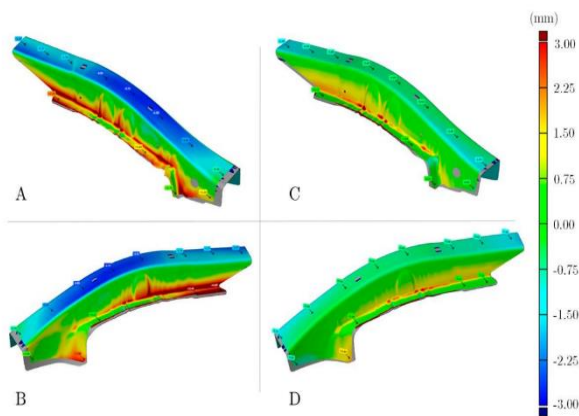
Metrology inspection report: A & B are hot stamped component; C&D are W-Temper component side views by Mendiguran et al. [4]
